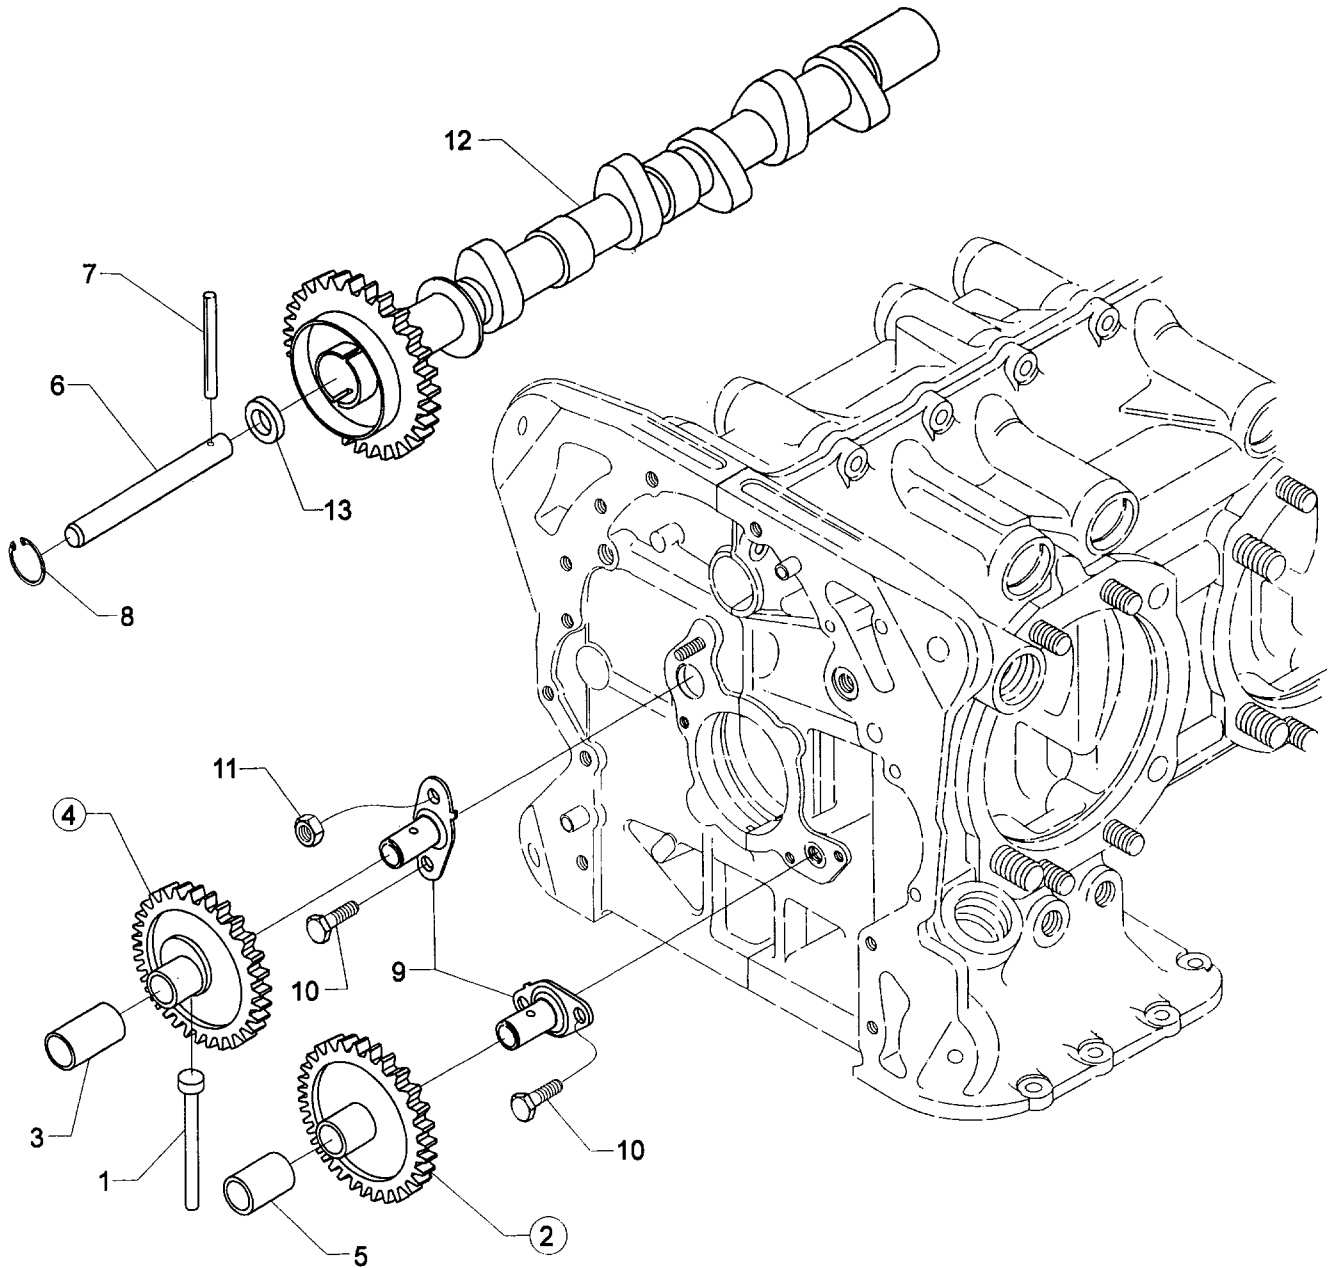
CRANKSHAFT IDLER GEARS, TACHOMETER DRIVE AND CAMSHAFT
